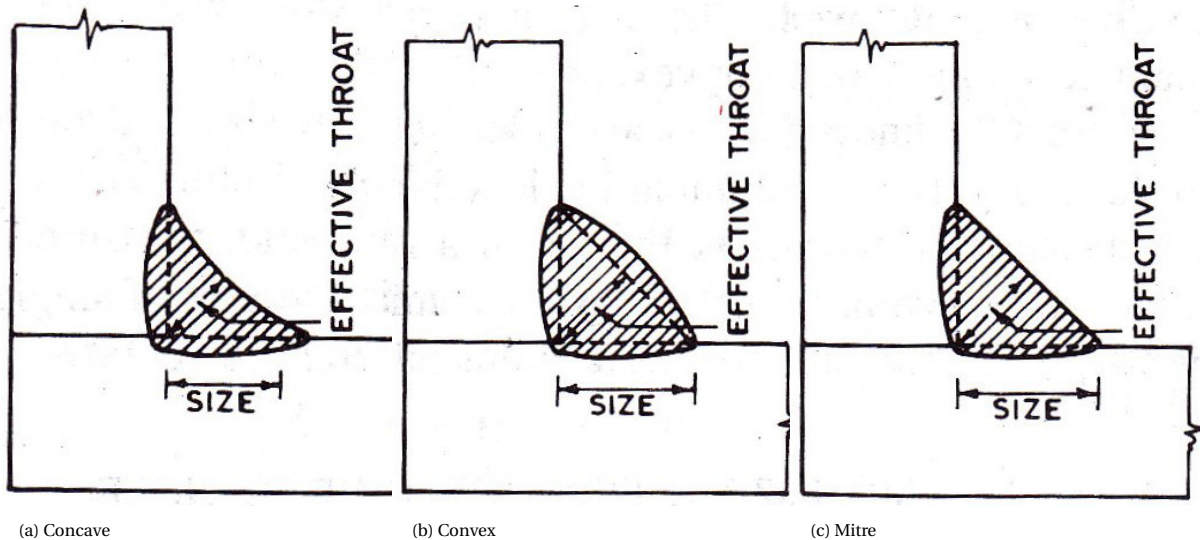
Three types of welded joints. Adapted from <http://ecoursesonline.iasri.res.in/>
